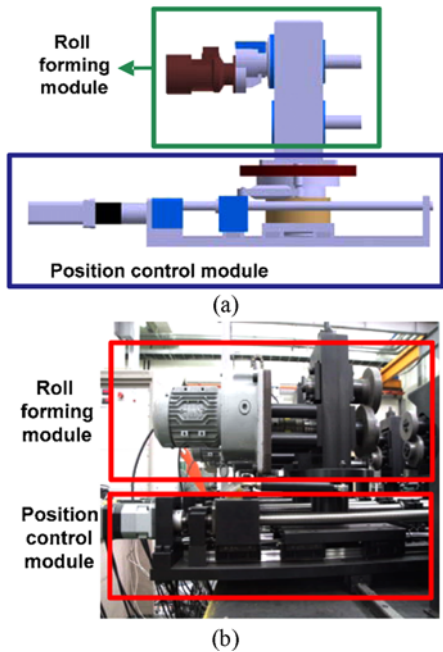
Unit of lab-scale flexible roll forming machine: (a) schematic of the unit; (b) unit of lab-scale flexible roll forming machine.
